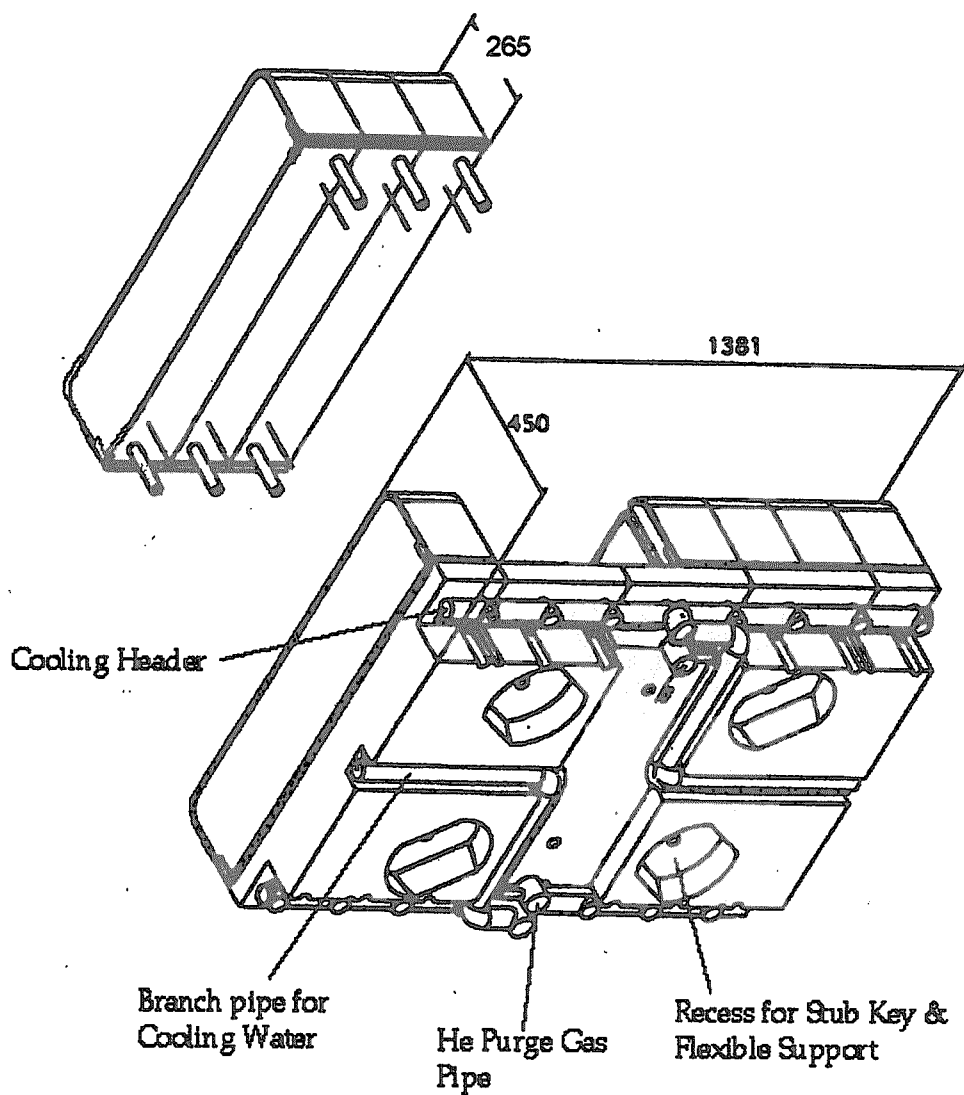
Rear Side View of the ITER Breeding Blanket
